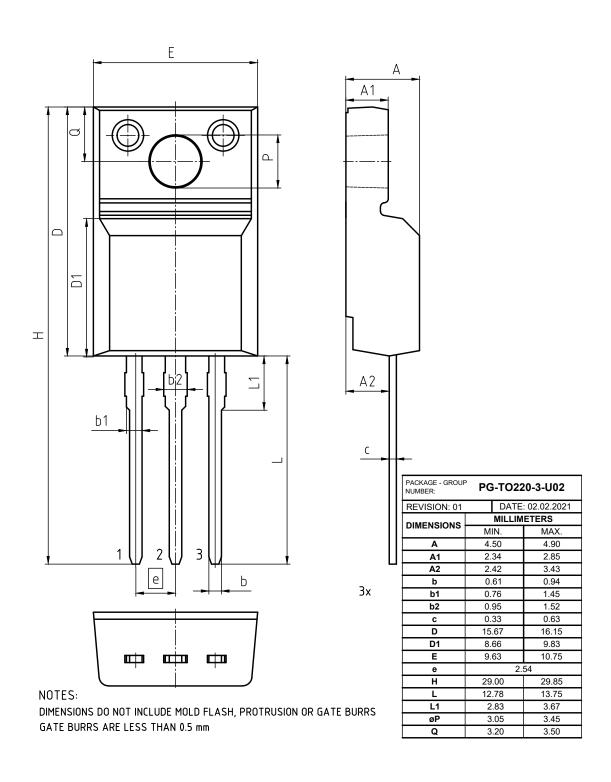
Outline PG-TO220 FullPAK, dimensions in mm
